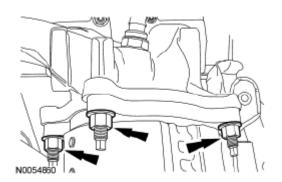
Identifying LH Exhaust Manifold Nuts Courtesy of FORD MOTOR CO.
